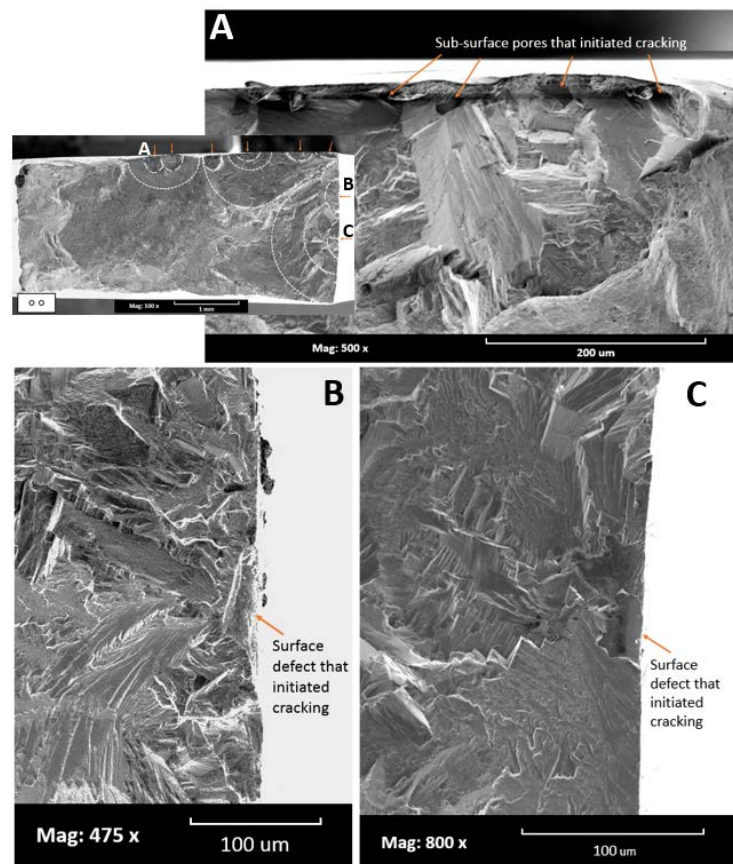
Surface defects that initiated cracking in the sample shown in Figure 42.
